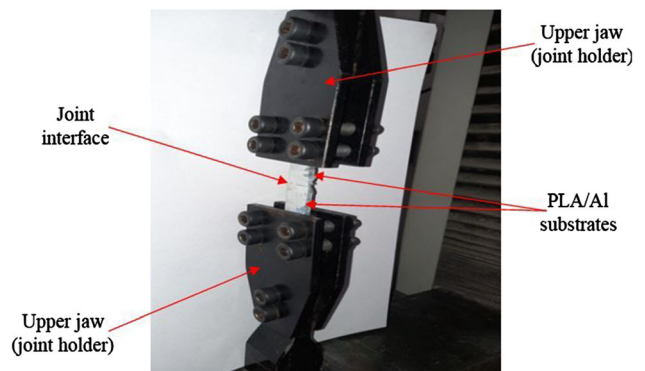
FSW-welded joint claimed to jaws of UTM
